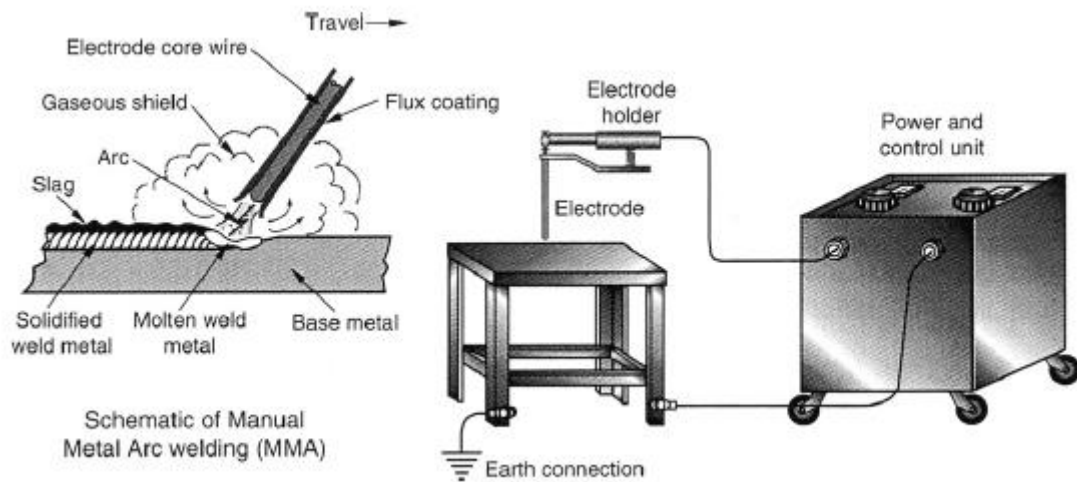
Manual Metal Arc Welding Equipment (Swift & Booker, 2013)
